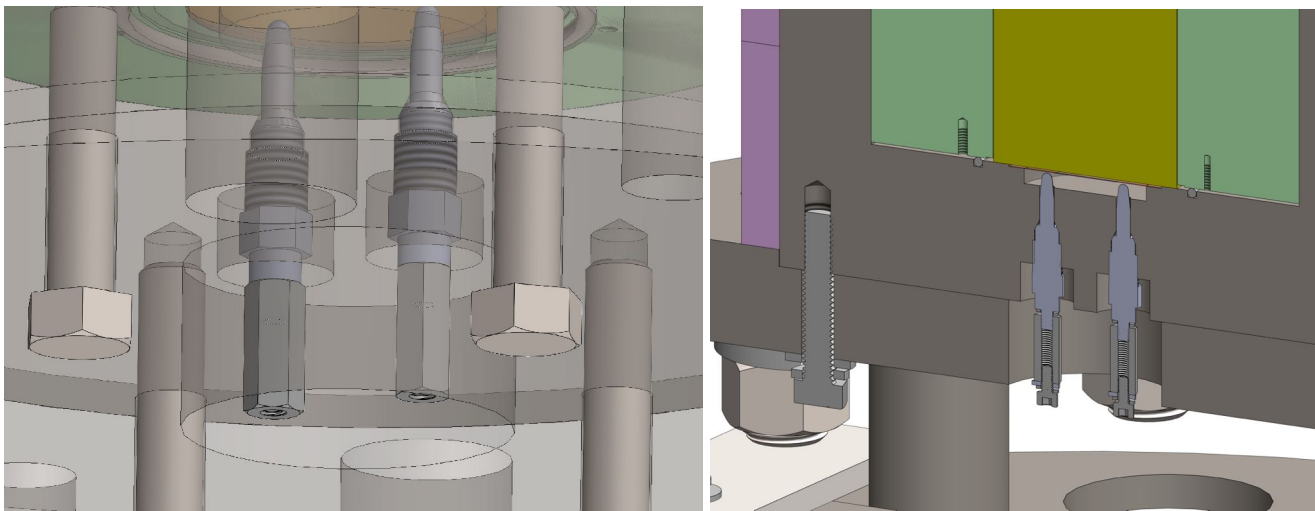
Left: Baseplate and end cap metal is transparent to show the female-threaded couplers installed on glow plugs. Right: Cutaway view
